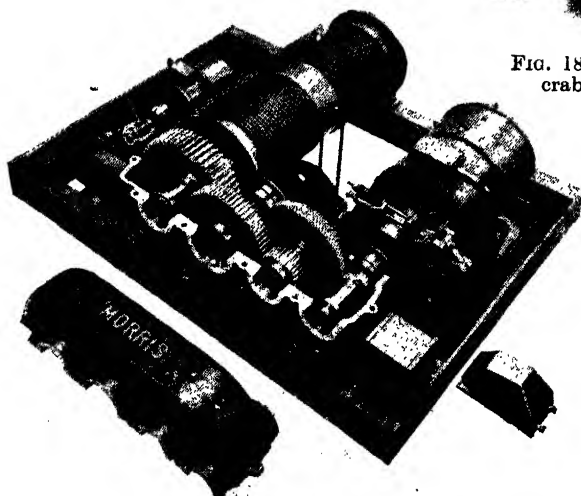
Morris electric overhead crane with ball bearings and enclosed gears.
